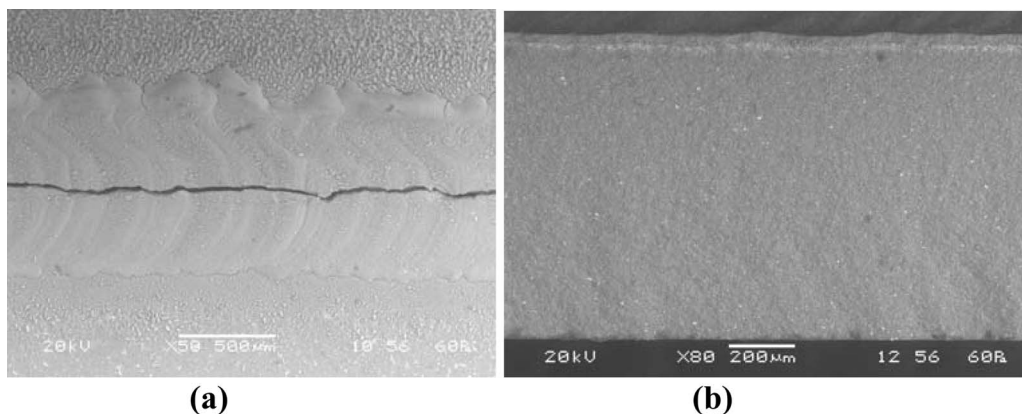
(a) Top and (b) transverse sectional views of thermal stress fracture mode laser-cut AlN ($P/DV=39$ J/mm²)
